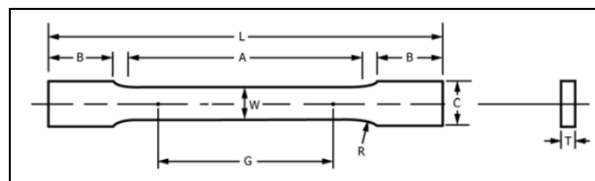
Rectangular tension test specimen in ASTM E8:2016
